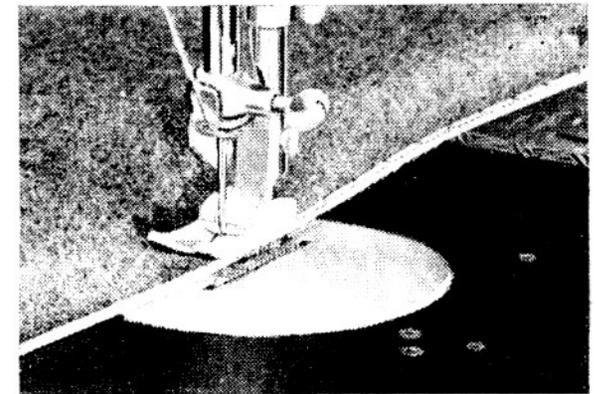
Blind Stitching Hem Finished with Seam Tape
